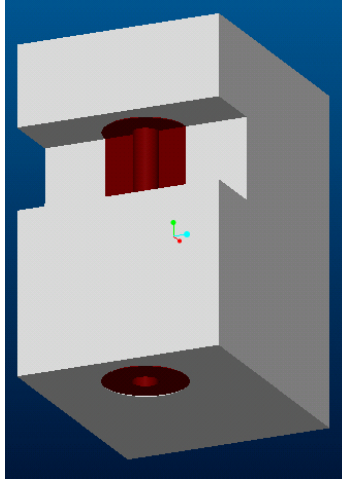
Solid Model of Air Bearing Showing Porous Carbon Bearing in Red and Aluminum Housing in Gray
